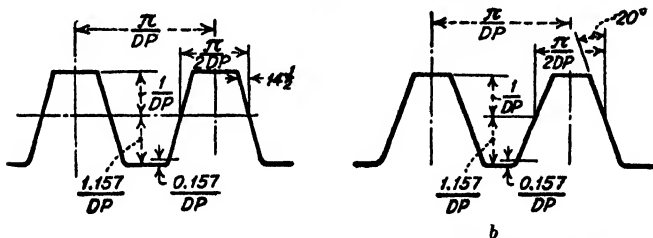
(a) Basic rack of 14½-deg. generated gear-tooth system; (b) basic rack of 20-deg. full-depth, gear-tooth system.
